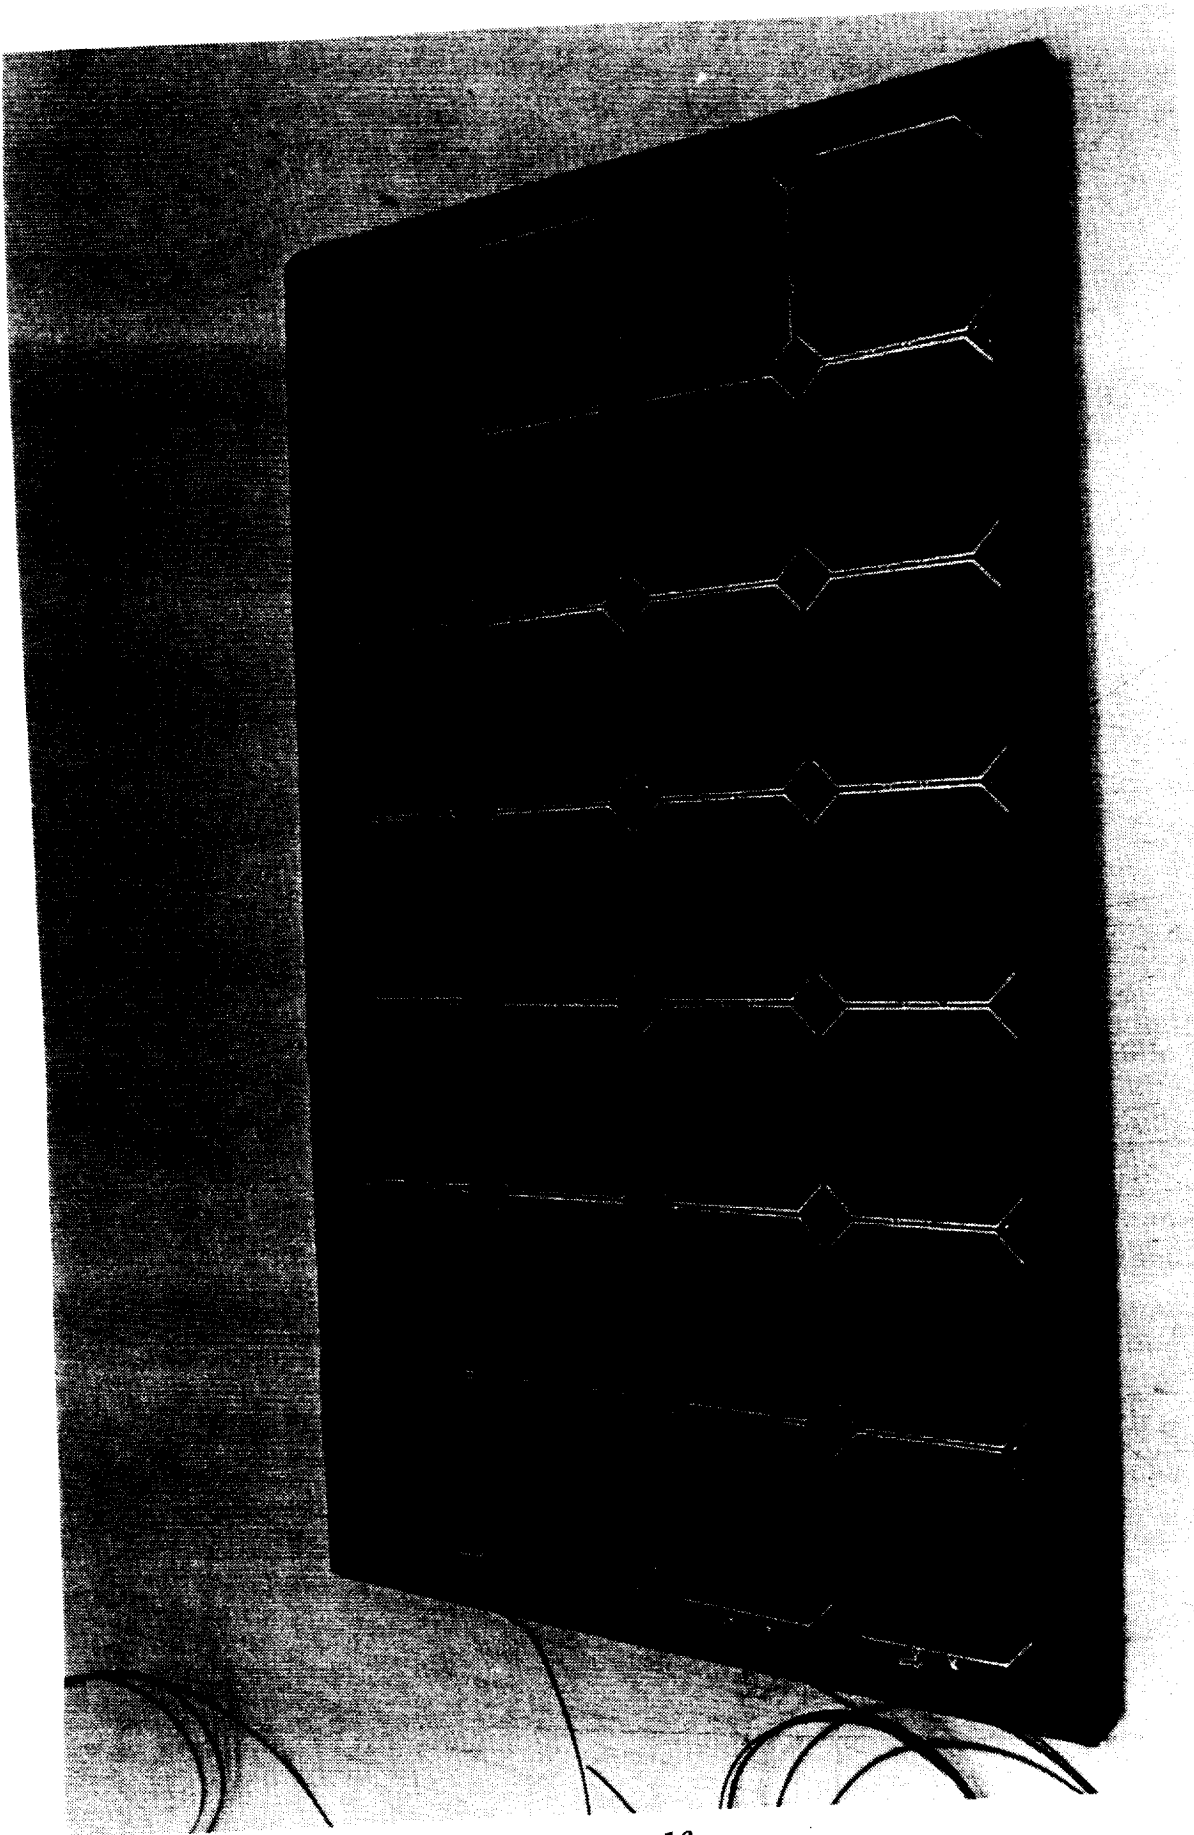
Module/Plate Assembly (Conventional) x8517165-501
